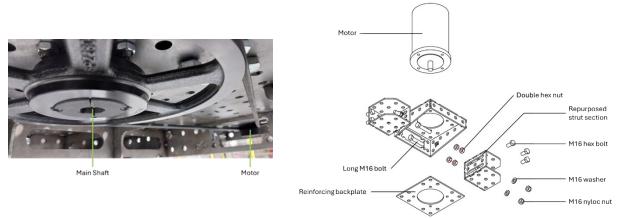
Photograph of main shaft belt drive arrangement (Left). Exploded isometric of motor slide.
